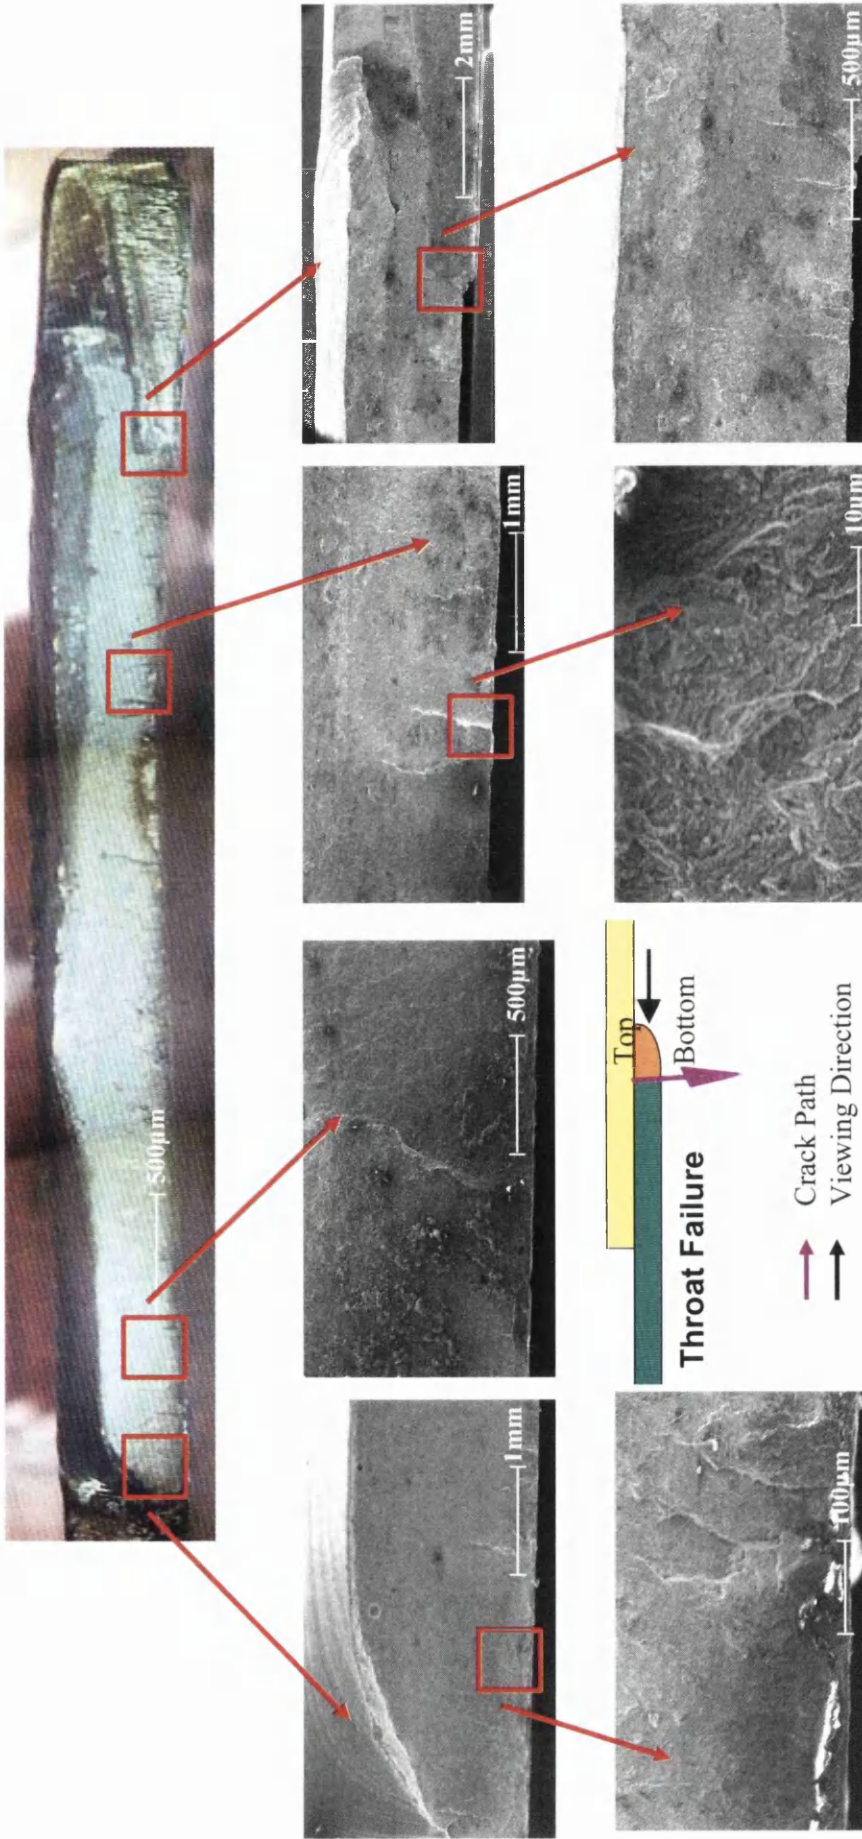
Typical Fracture Surface for Variable Amplitude SAE Bracket Load-Time History GM1 Weld Throat Failure – Sheet View
